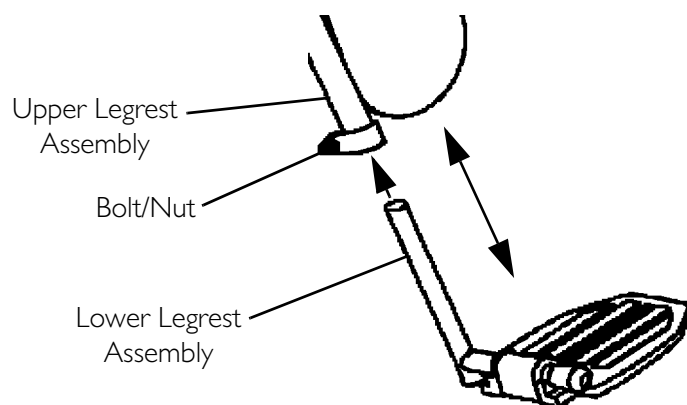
Adjusting Mechanical Elevating Legrests - Calfpads
